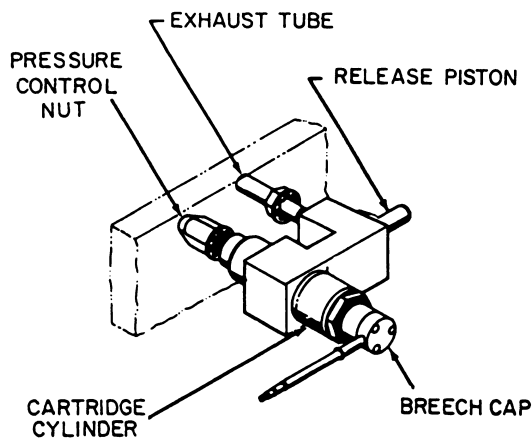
BRU-10A/A bomb ejector rack auxiliary release unit assembly.
